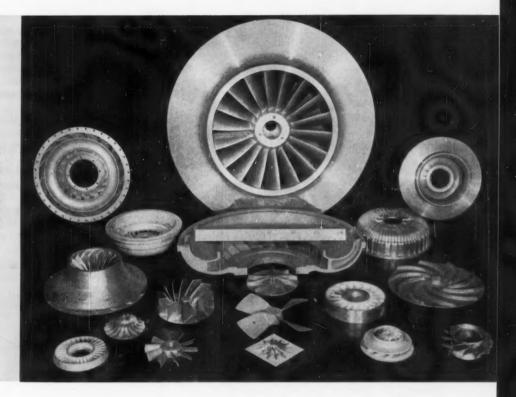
Typical aluminum high-speed rotating parts fabricated by sand, permanent-mold, semipermanent - mold, plaster and die casting, furnace brazing, forging and pressing. Some of these parts operate at 70,000 rpm.
